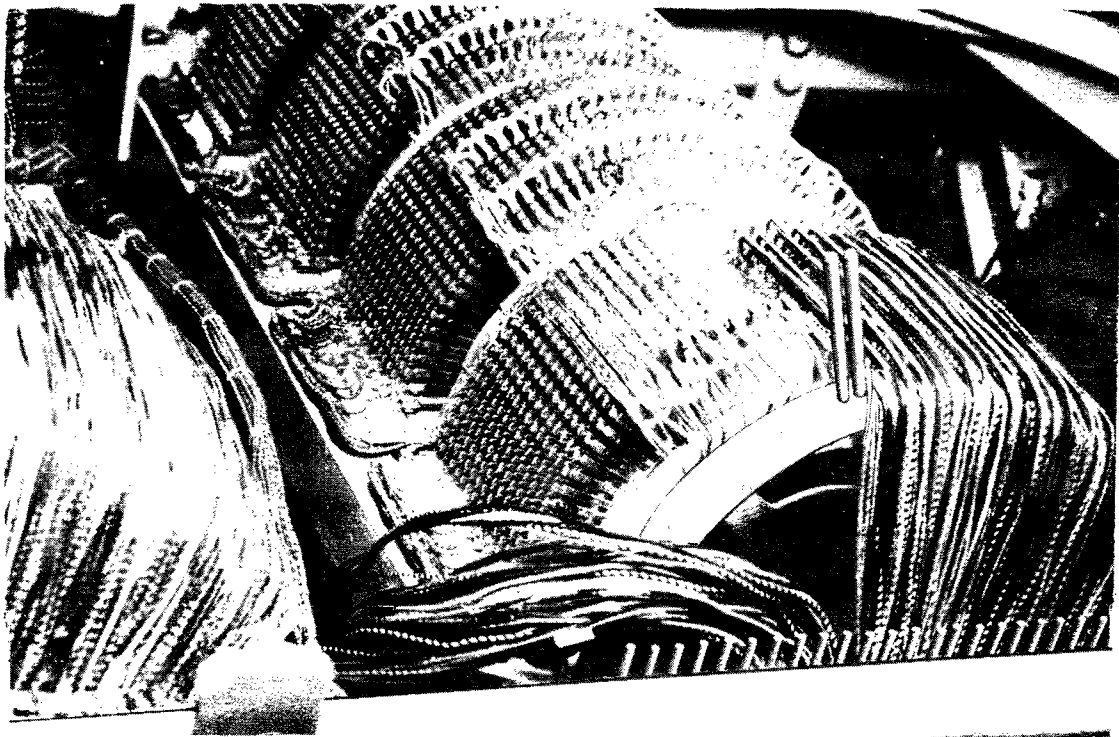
MOTOR UNISELECTOR FORMING JIG - WIRES BEING TERMINATED.
